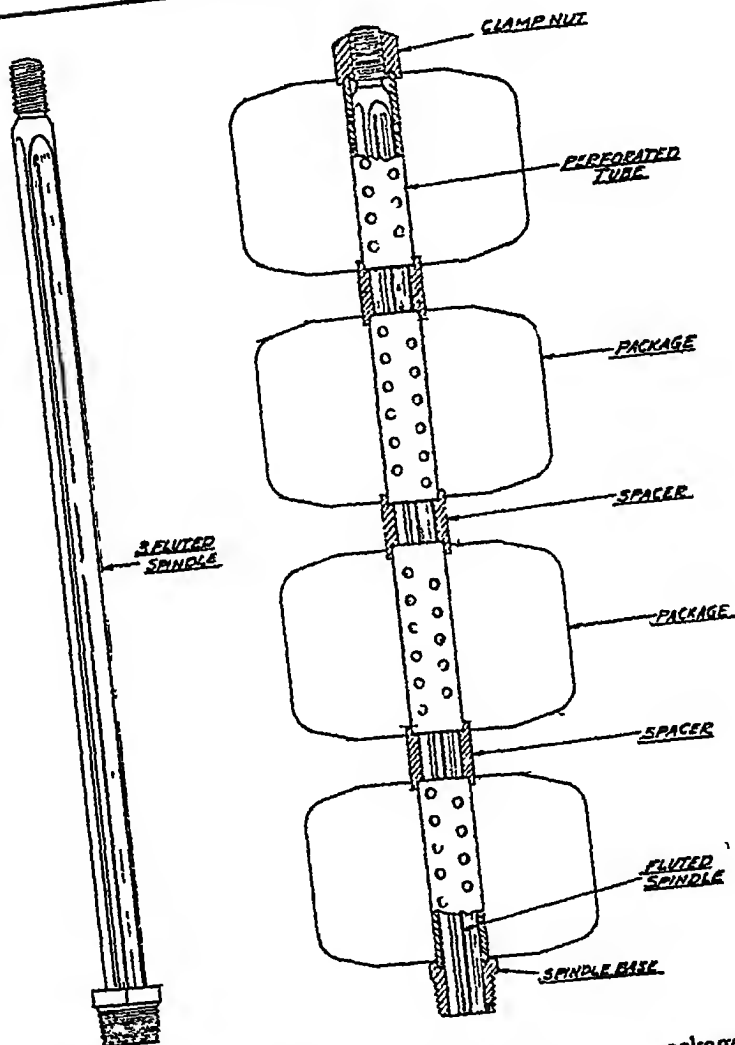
a) Fluted spindle b) Mounting yarn packages
